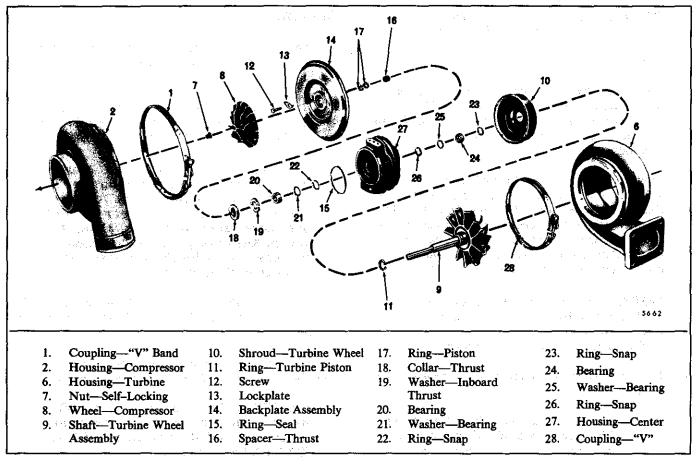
TV7301 and TV8101 Turbocharger Details and Relative Location of Parts.
